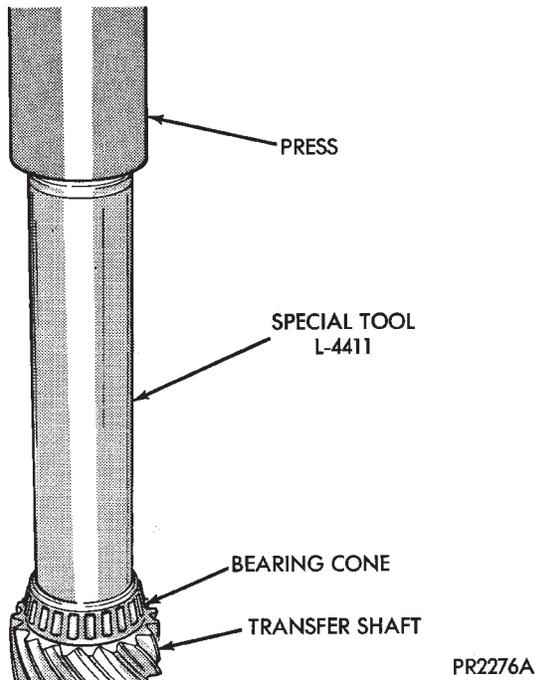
Remove Transfer Shaft Bearing Cone
